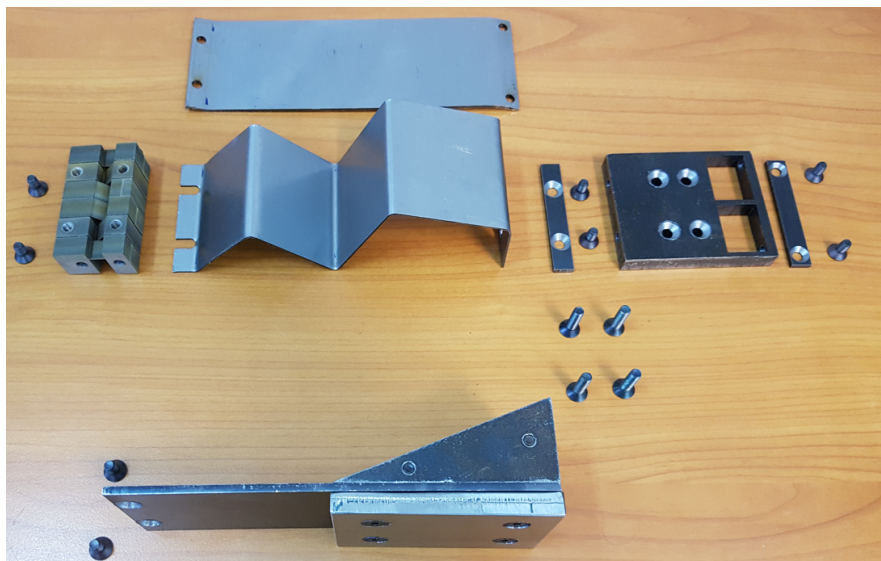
Fastening the triangular block and 8.5 mm thick plate to the 3 mm plate.
